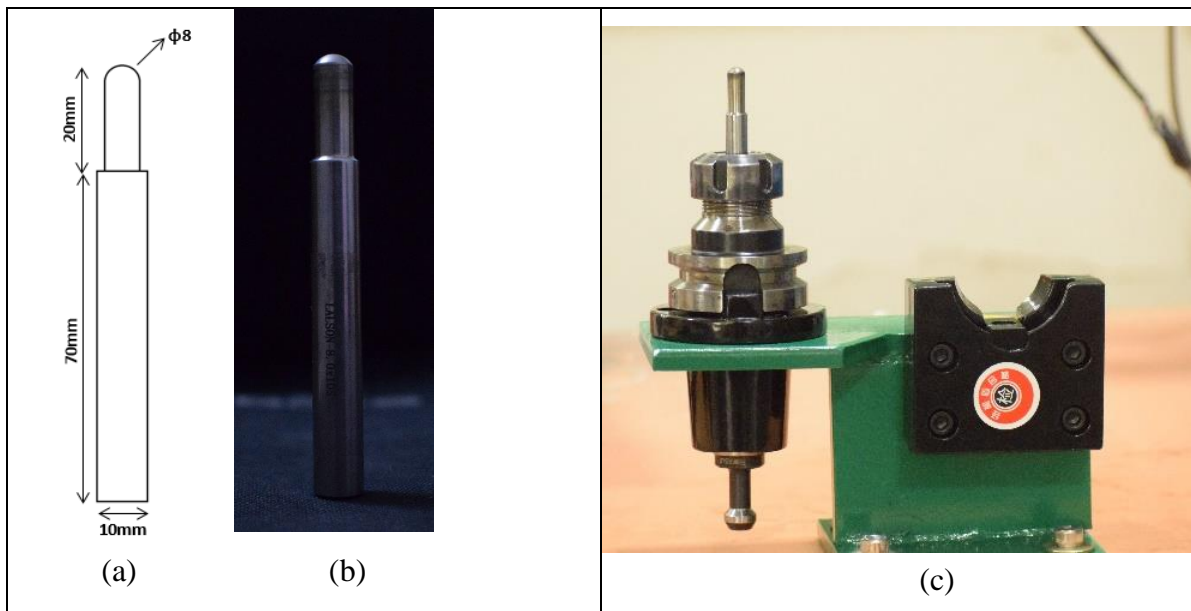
Forming tool (a)Drawing of hemispherical tool (b) manufactured tool(c)The forming tool installed in the chuck.
